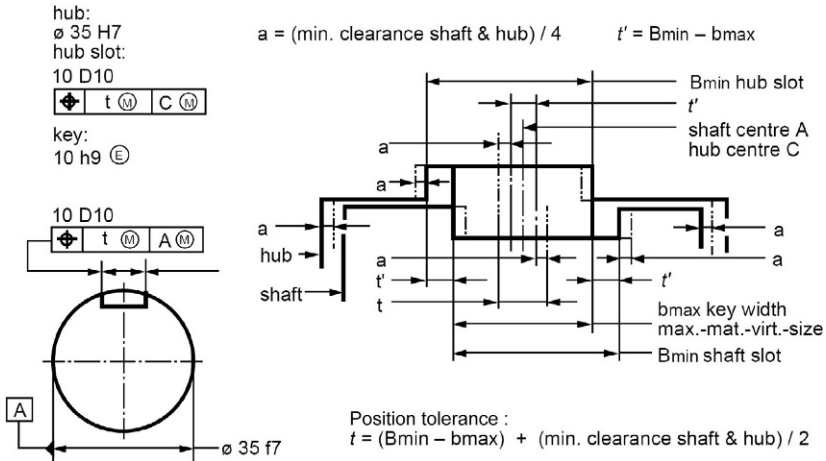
Additional position tolerance $2a = (\text{minimum clearance between shaft and hub diameter}) / 2$
